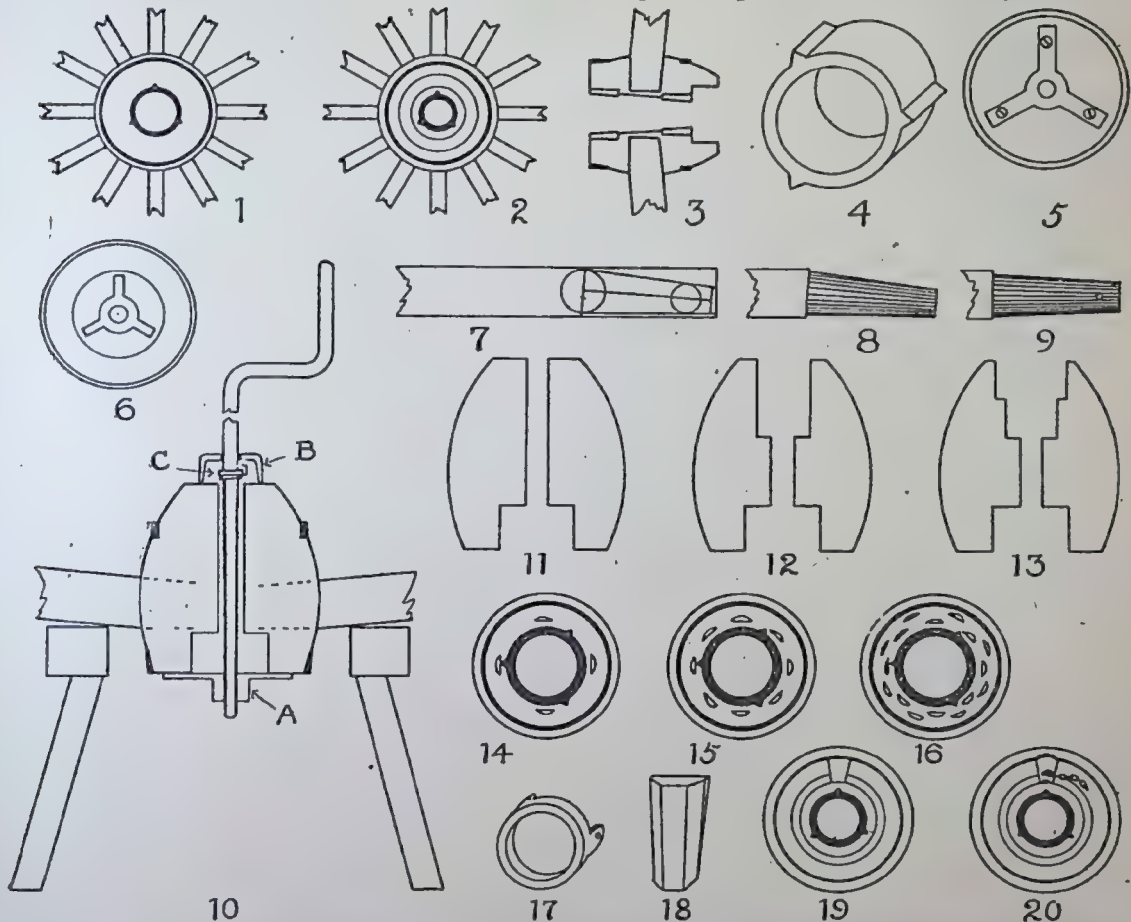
Back end of Hub, with Box. Fig. 2.—Front end with Box. Fig. 3.—Section, with Boxes in position. Fig. 4.—Cast Iron Box for back end of Hub. Fig. 5.—Back of Hub with threaded fitting. Fig. 6.—Front of Hub with Boring Bar. Fig. 7.—Setting out Axle Arm. Fig. 8.—Axle Arm shaped (side). Fig. 9.—Axle Arm shaped (plan). Fig. 10.—Sectional detail showing Boring Bar and fittings in position. Fig. 11.—Section of Hub bored, and with recess for back Box. Fig. 12.—Section of Hub with back and front recesses. Fig. 13.—Section of Hub with both Box recesses, also front recess. Fig. 14.—Back Box with 4 Wedges. Fig. 15.—Back Box with 8 Wedges. Fig. 16.—Back of Hub with Box fixed. Fig. 17.—Iron Ring for Axle. Fig. 18.—Wedge. Fig. 19.—Opening for Linch Pin cut in front of Hub. Fig. 20.—Linch Pin cover fitted to Hub.
